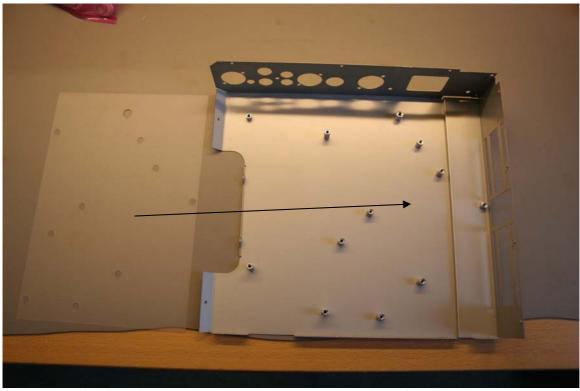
Use isolation plate DR09019 and Inner box Bottom DR09006-F, for this sub assembly.
